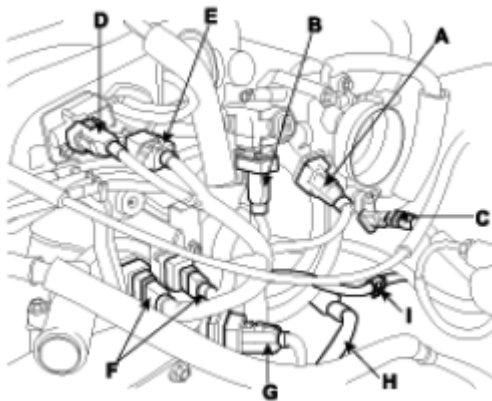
Identifying ISA, TPS, VIS Actuator And PCSV (Purge Control Solenoid Valve) Connector
